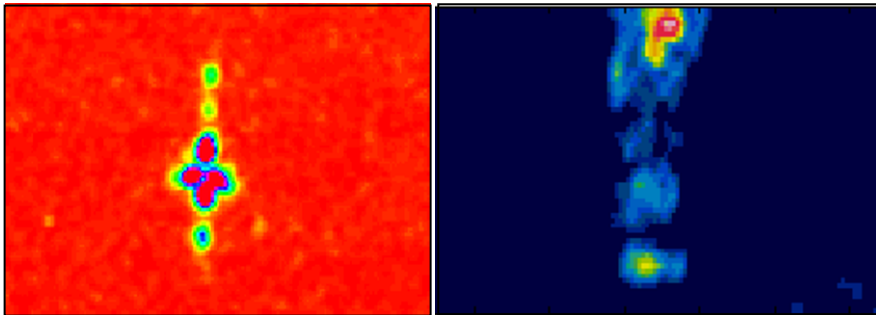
NACE imaging in steel specimens: (9-11th) harmonic imaging of 50 μm-wide fatigue crack (left); (5x40 mm) hammer peening area in steel plate (right).
